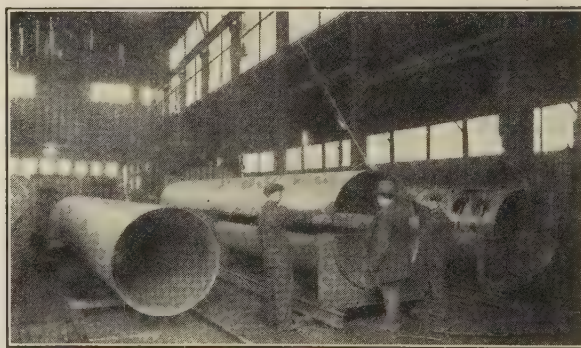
FRAMES OF SPECIAL DESIGN SUPPORT THE TWO 30-FT. HALF SECTIONS OF 48-IN. PIPE WHEN BEING TACK WELDED BY HAND FROM THE INSIDE
